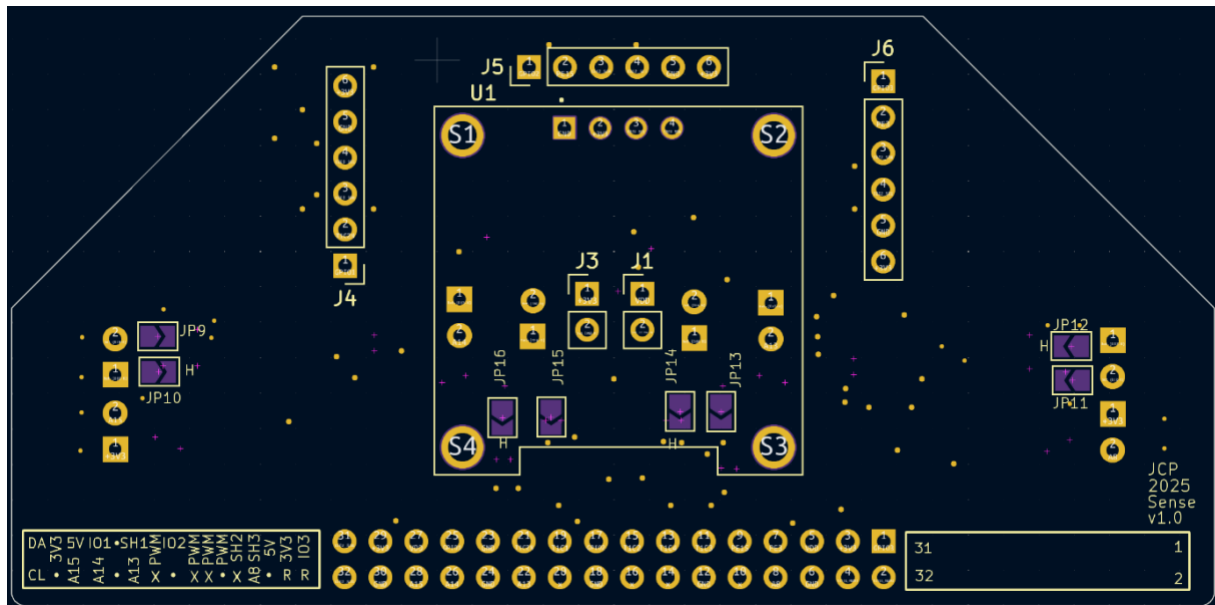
MM Sensing pinouts that plug in the MM Motherboard PCB
